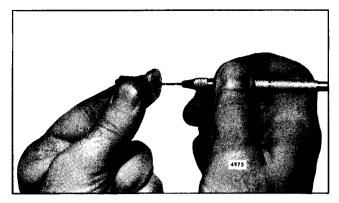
· Cleaning Injector Spray Tip with Tool J 24838
